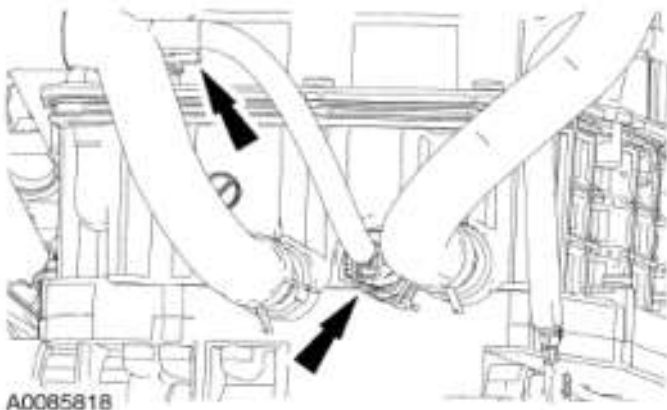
Locating Transaxle Coolant Temperature Sensor Electrical Connector
